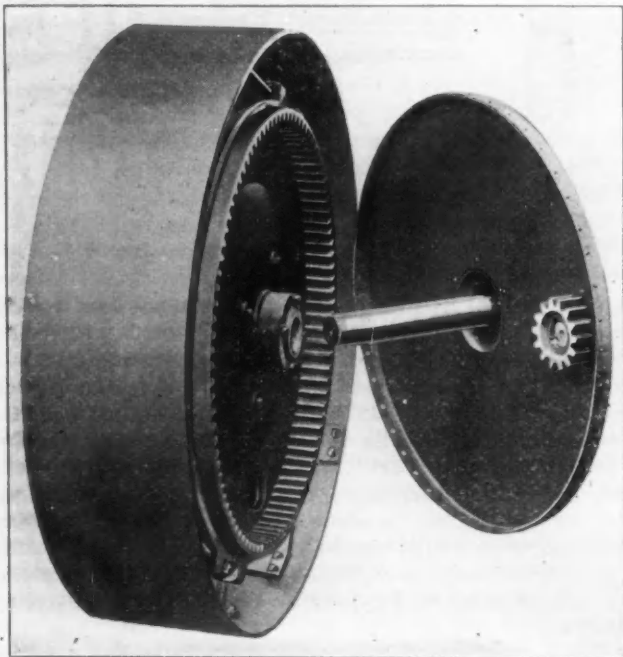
MINNEAPOLIS STEEL AND MACHINERY COMPANY'S INTERNAL GEAR FINAL DRIVE
